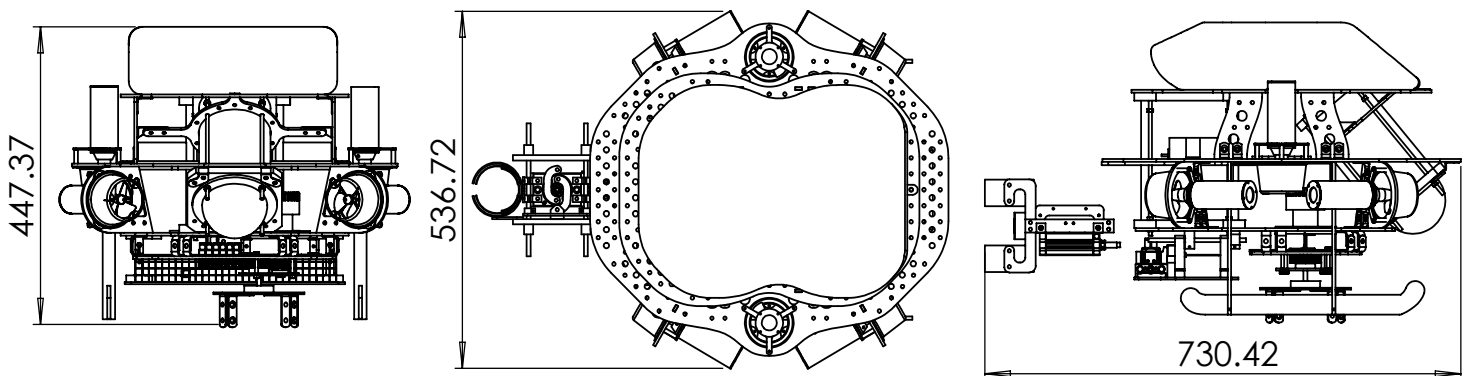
CAD drawing of the Stingray with Mission 3 manipulators (dimensions in mm)
